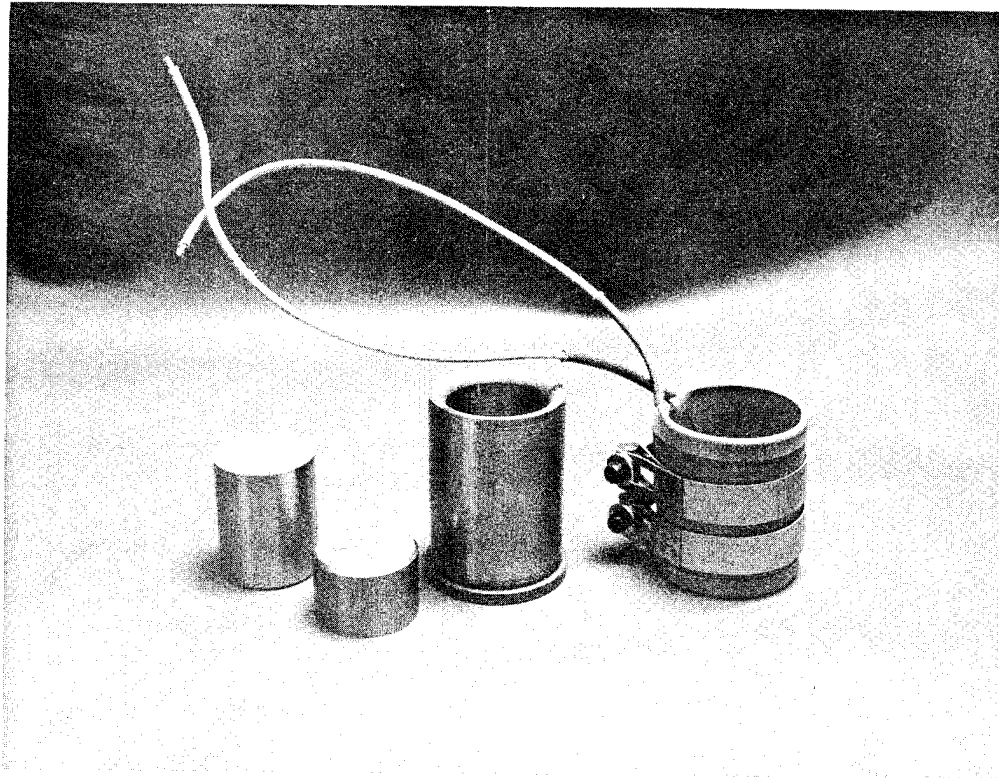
Disassembled Mold and Heater Employed for Polyimide Fabrication.
